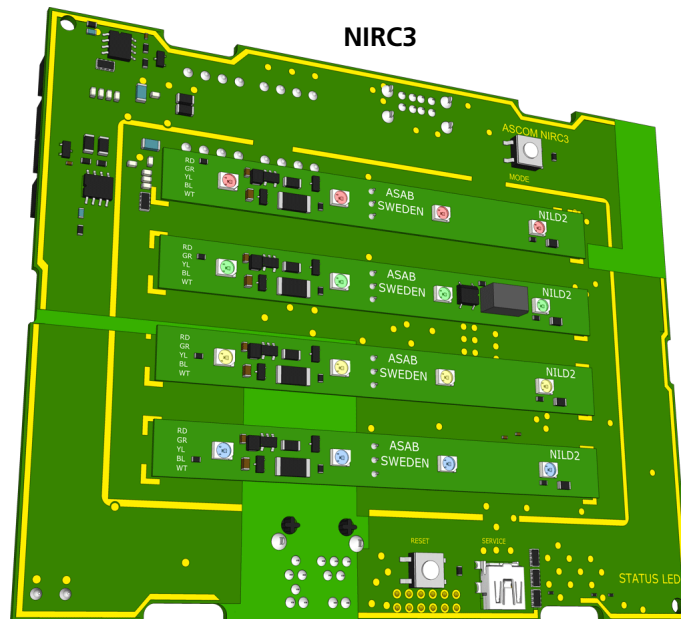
NIRC3- room controller PCB with 4 LED lamp boards
